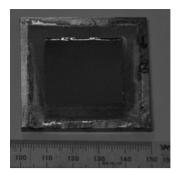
Photograph of the tungsten coating on F82H RAF steel obtained by underwater explosive welding.
